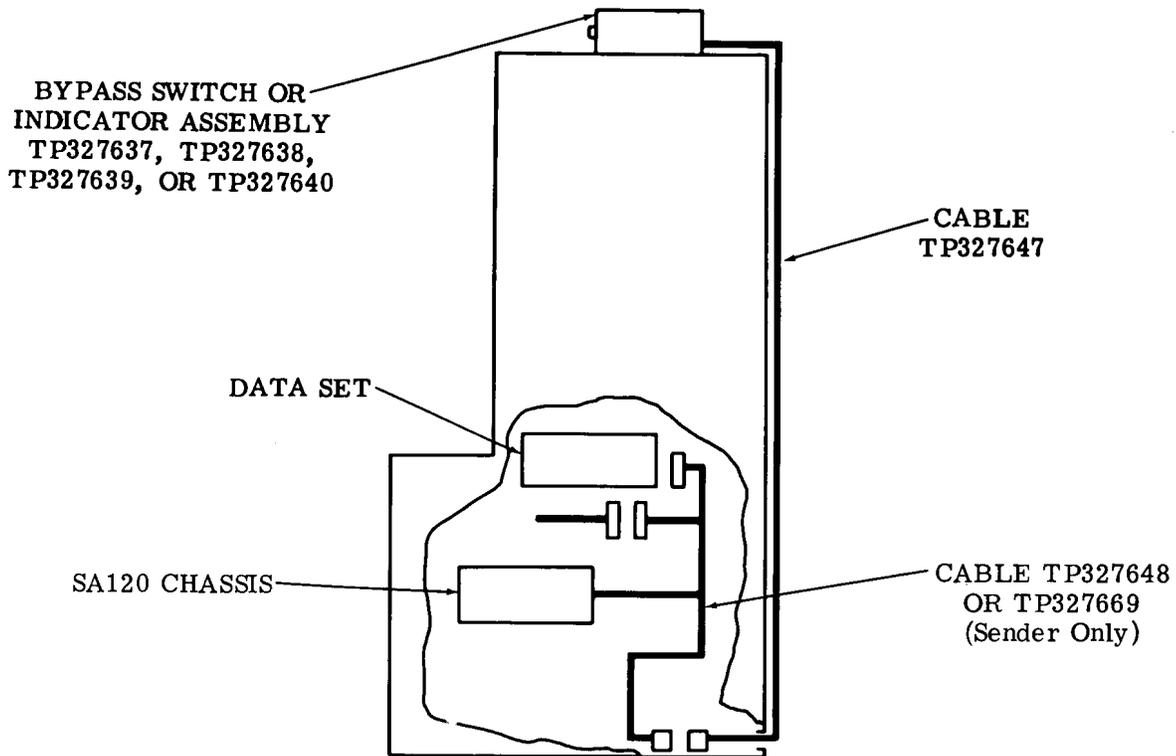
Location of SA120 Chassis and Bypass Switch or Indicator Assembly on Type 2 Sender or Receiver
